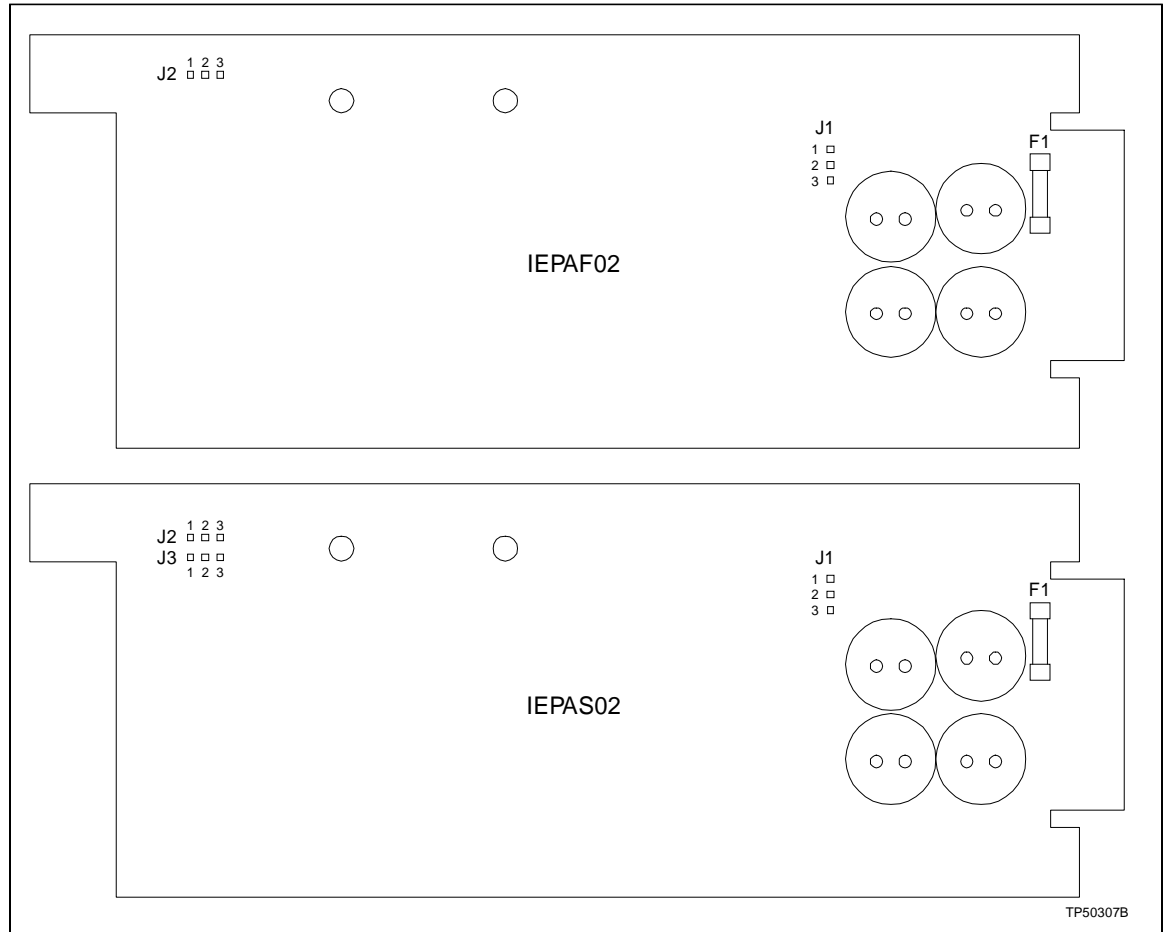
IEPAF02 and IEPAS02 Power Module Board Layout
